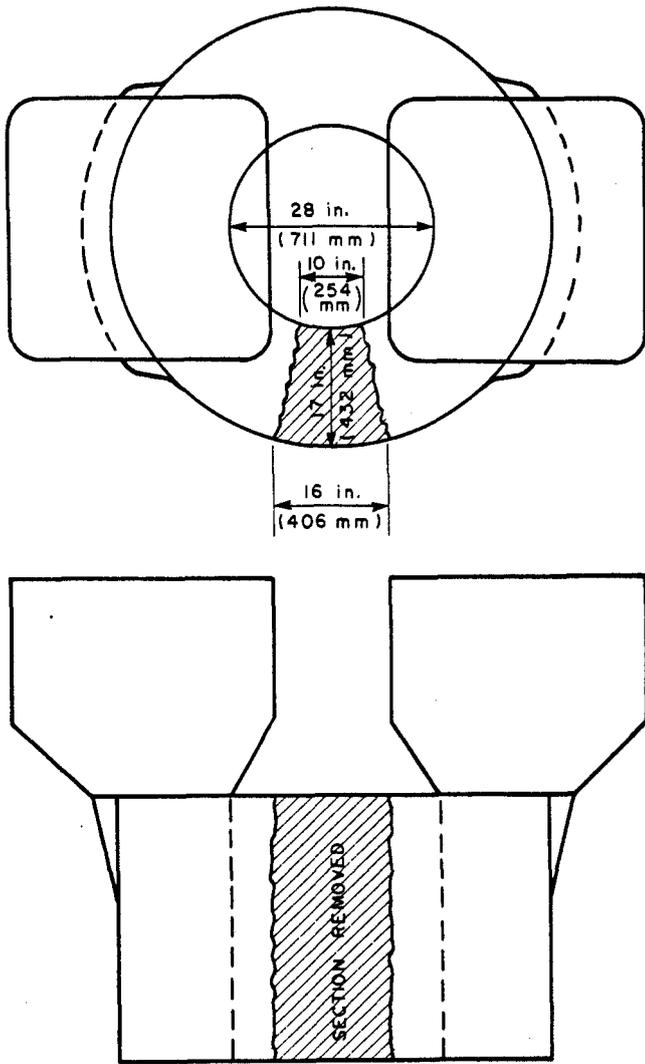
Sketch of cast gear, quenched and tempered cast 8630 steel, showing location of section from which trepanned specimens were removed.
